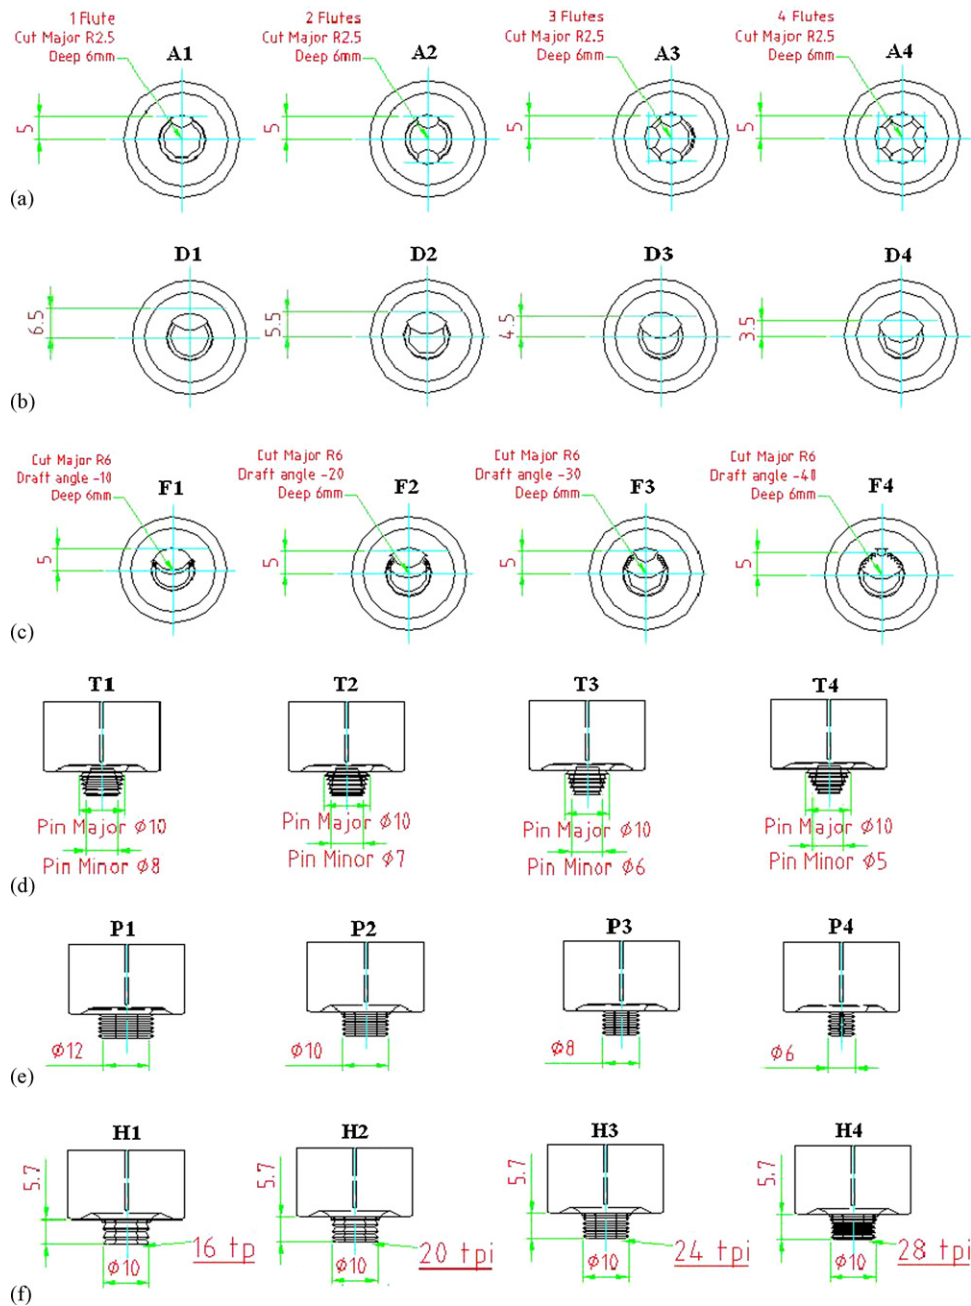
(a) Pin flute details on A-series tools; (b) pin flute depth details on D-series tools; (c) pin flute angle details on F-series tools; (d) pin taper details on T-series tools; (e) pin diameter details on P-series tools; (f) pin thread details on H-series tools.
